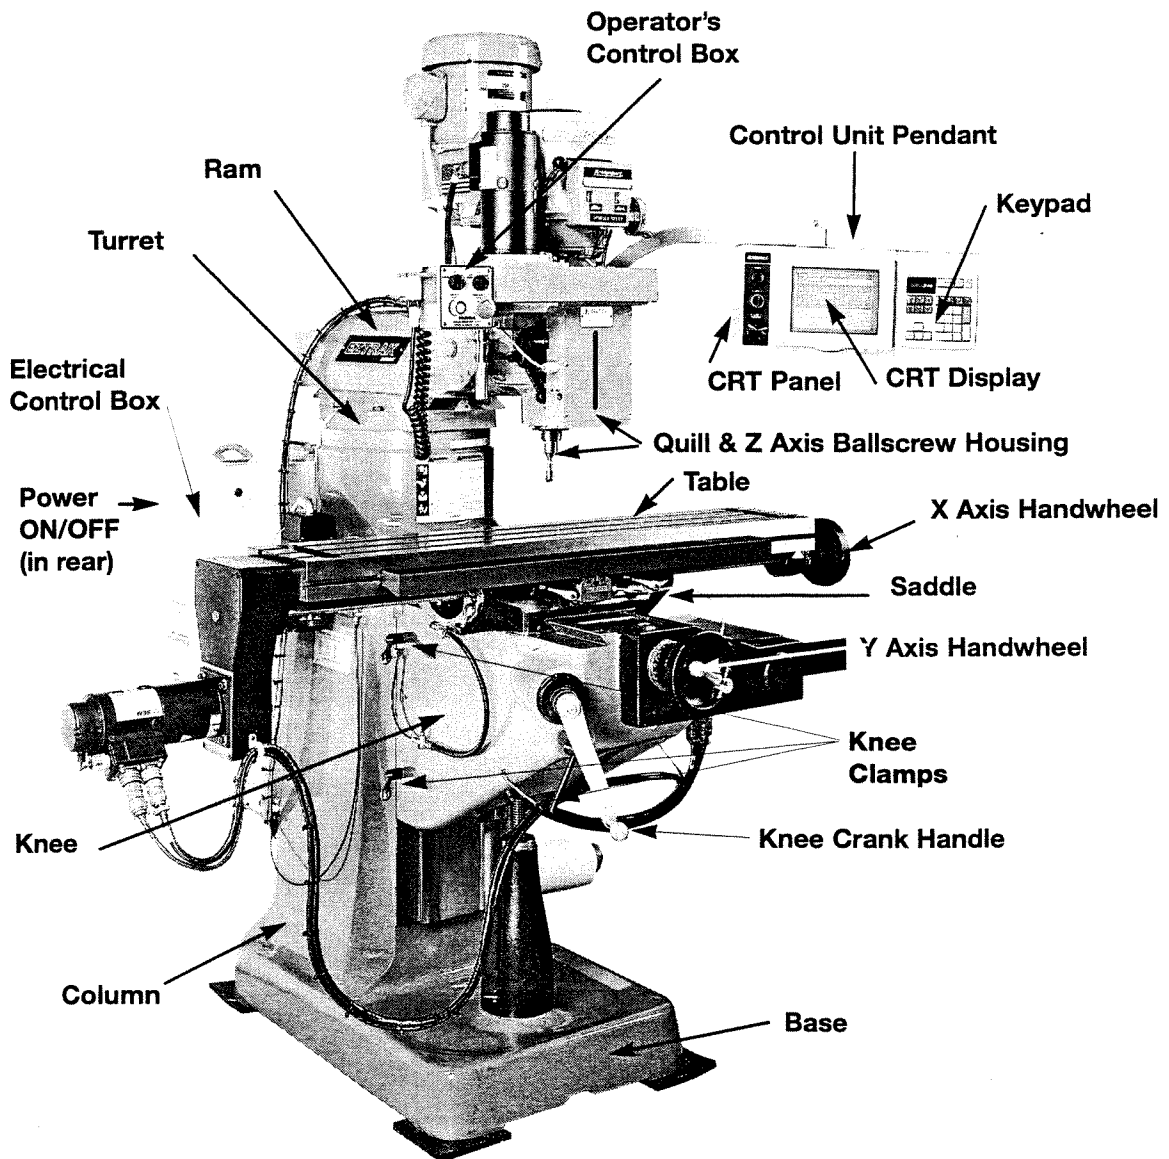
Basic components of a 3-Axis EZTRAK Milling Machine
